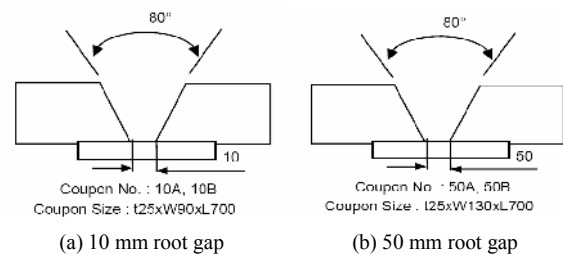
Single V-groove dimensions for fabricating the Alloy 617 weldments.
